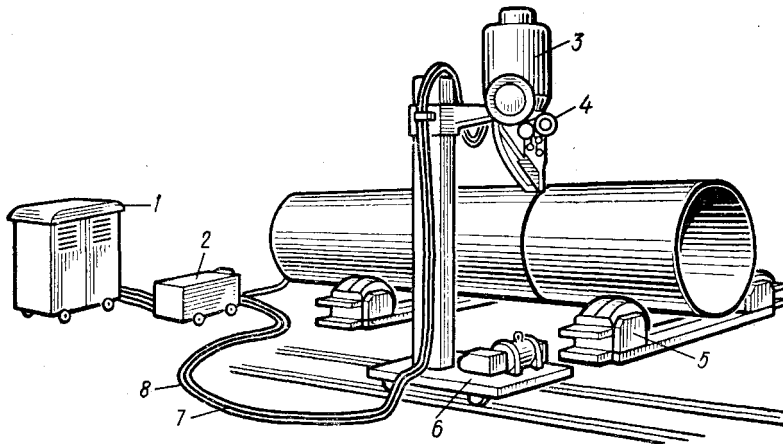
Installation diagram for automatic submerged arc welding of longitudinal and annular seams:
